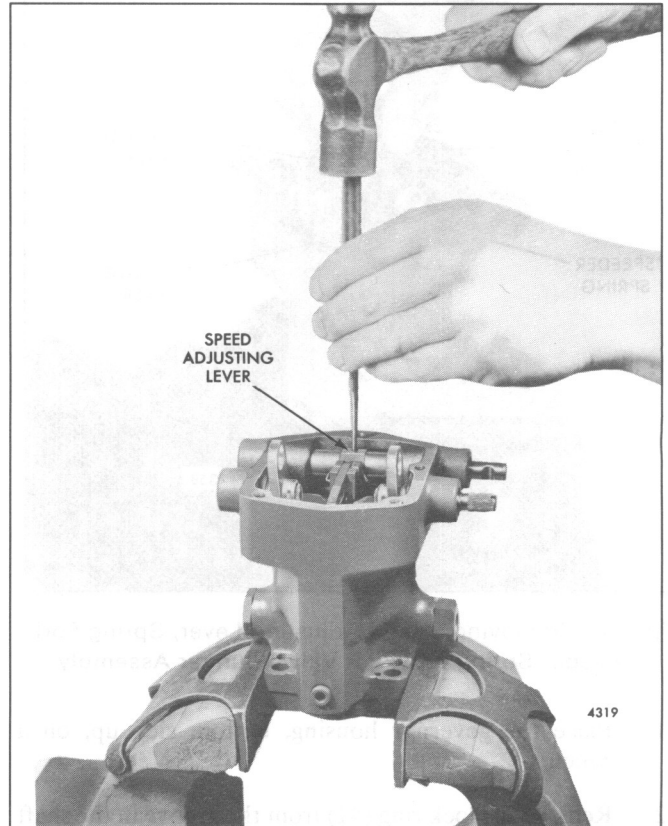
Removing Speed Adjusting Lever Roll Pin
